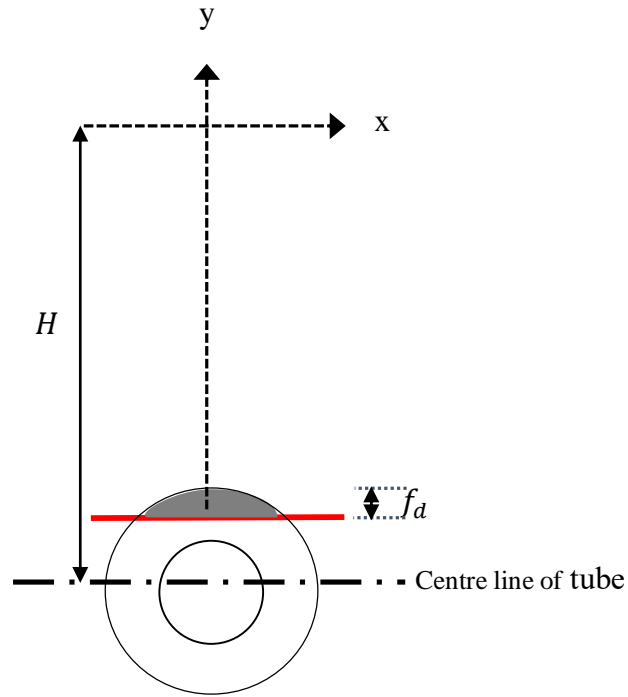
Schematic showing the modelling of a flat line flawed tube - cross-section
